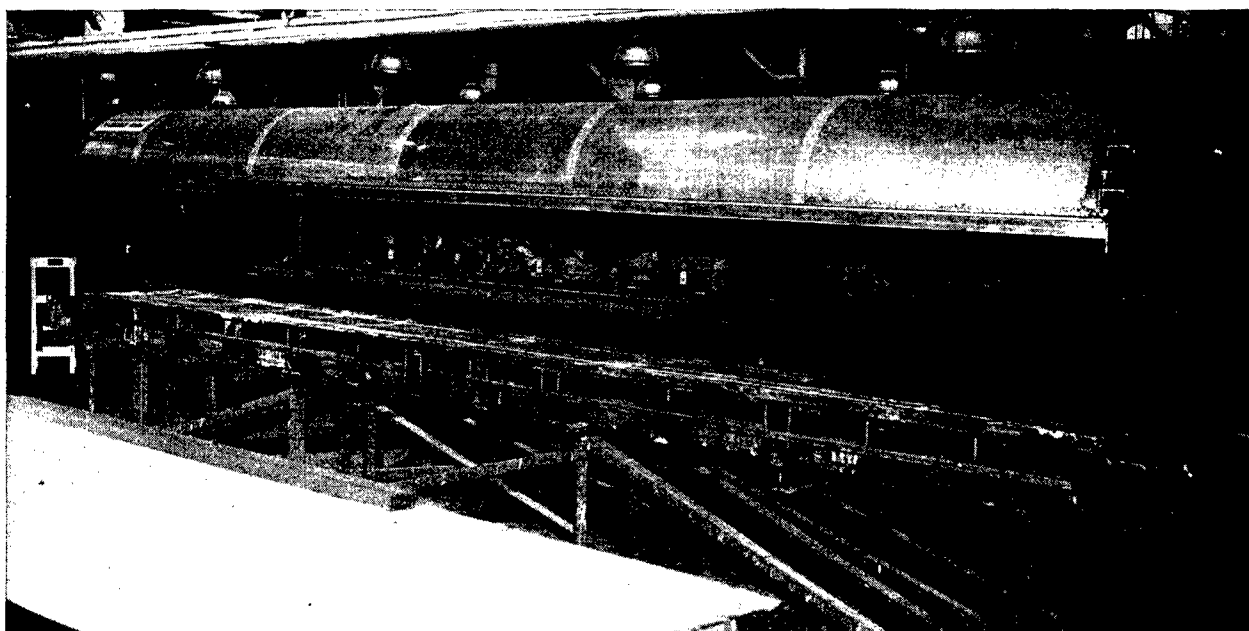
Internally heated mold for producing sandwich skins for helicopter blades.
